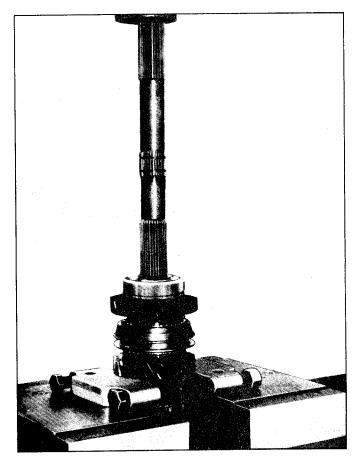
B-12K--Pressing Rear Bearing From Mainshaft
